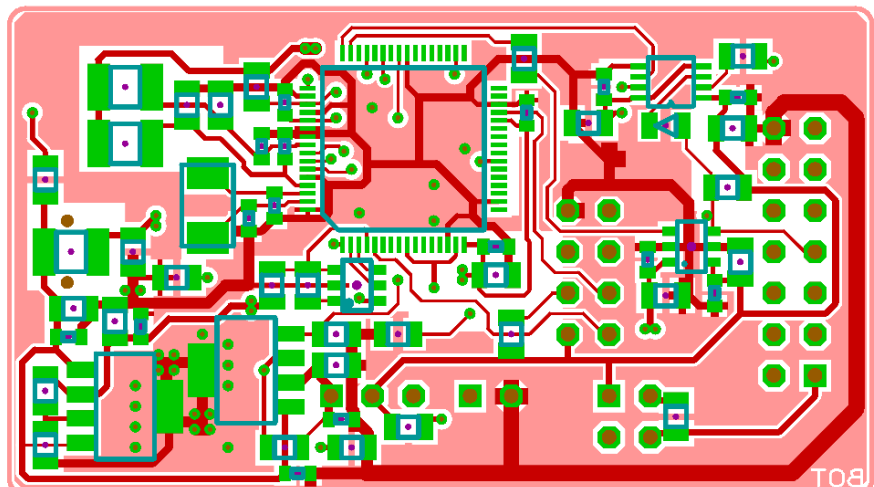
Sensor Board Layout – Top Layer with PIN Configuration on Connector X1
